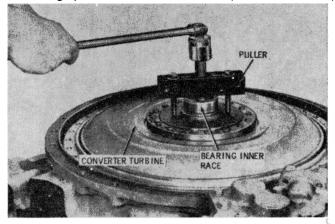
Removing Torque Converter Turbine remove the spanner nut which secures the freewheel roller race to the converter ground sleeve (Figure 15-50). CAUTION
